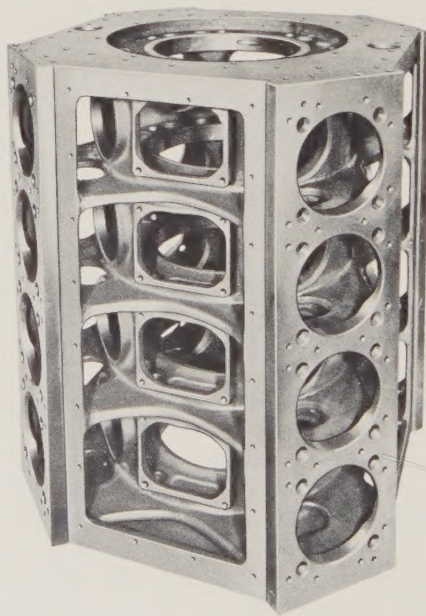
View of the finished barrel-shaped crankcase consisting of 67 individual steel forgings welded together automatically.
